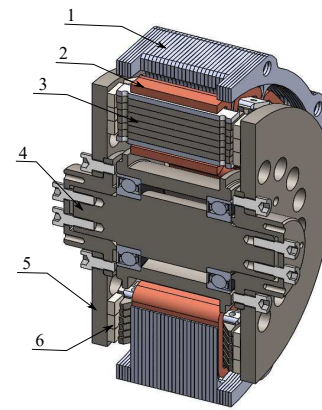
Cross-section view of the non-integrated YASA prototype: (1) Housing, (2) Winding, (3) Core, (4) Shaft, (5) Rotor Disk, (6) PMs
